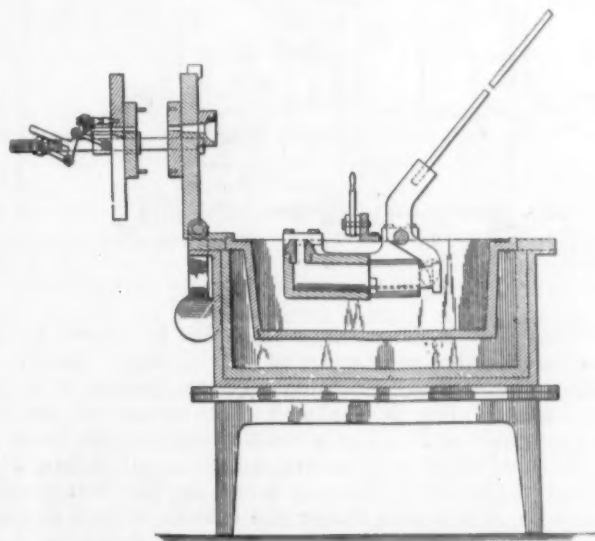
EARLY TYPE OF DOEHLER MACHINE.
